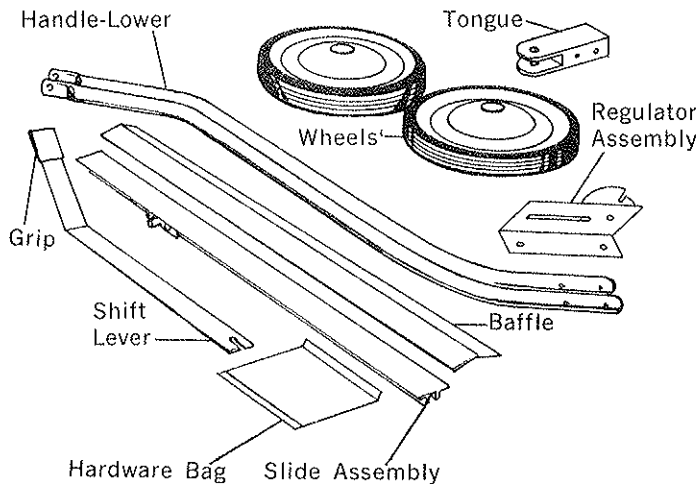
WHEELS - SHIFT LEVER - TONGUE
